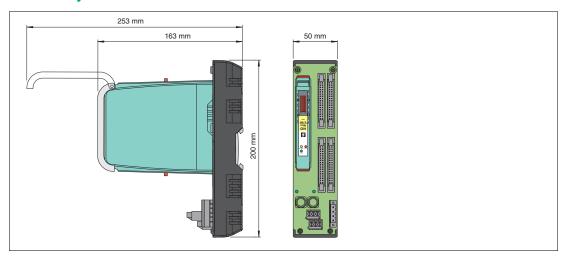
Dimensions (W x H x D): $50 \times 200 \times 163 \text{ mm}$ (1.97 x 7.9 x 6.42 inch), depth including module assembly
